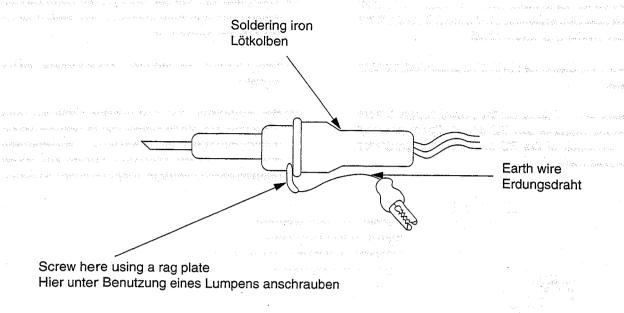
Earthing of Soldering Iron Abb. 4. Erdung des Lötkolbens
